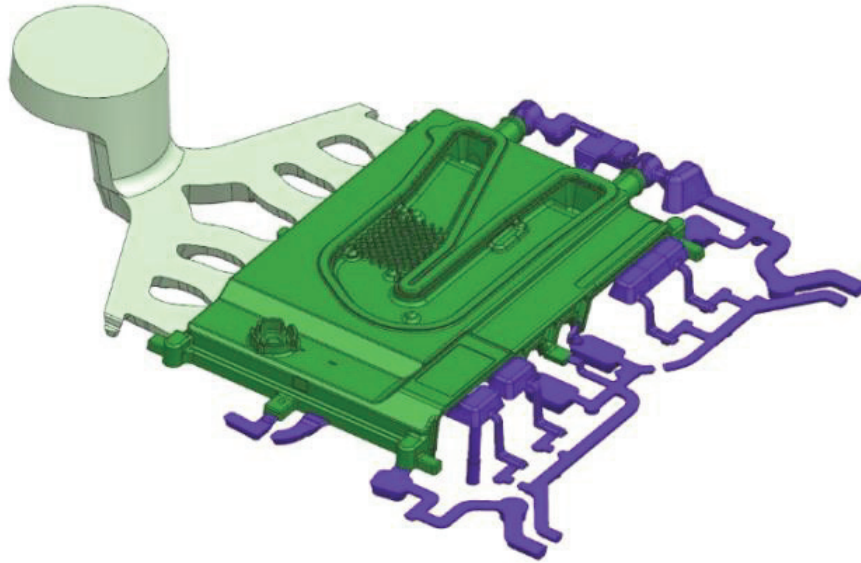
3D model of pouring and riser system for the bottom shell die casting
